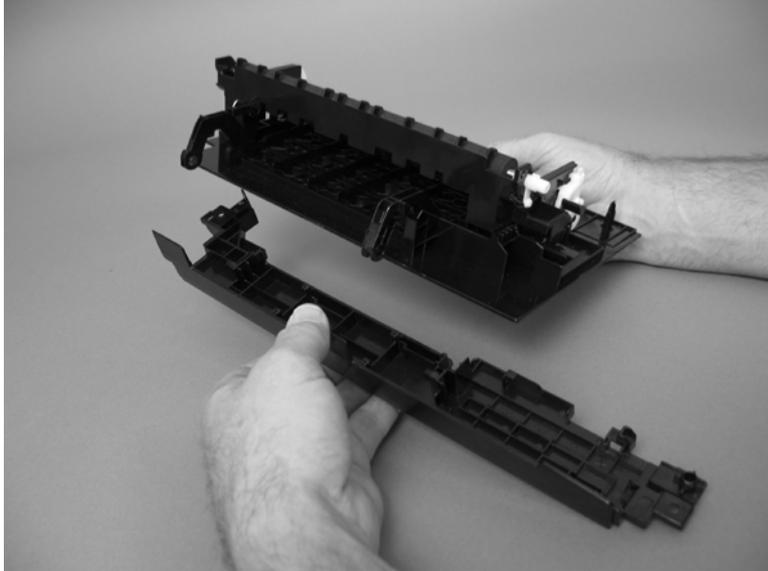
Remove the rear door and rear-lower cover (4 of 5)
